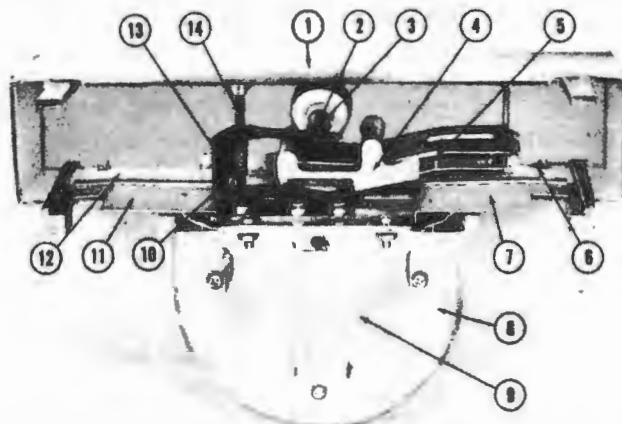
TOP CASTING ASSEMBLY, 5220A-5225A
